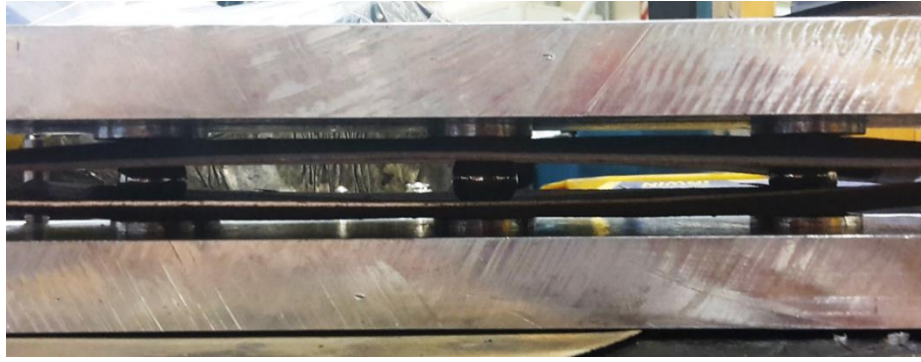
Clamshell mould, with two sheets and ball bearings.
